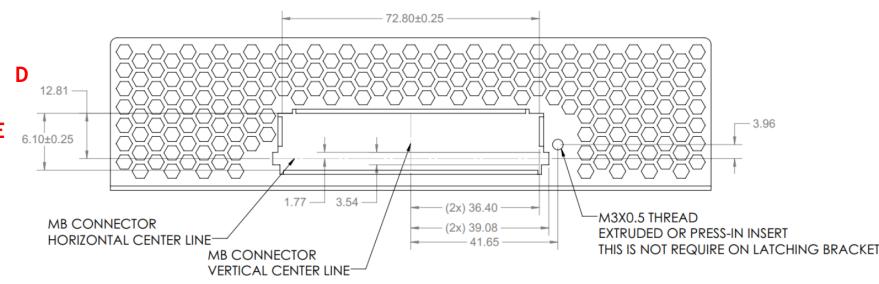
SFF Baseboard Chassis CTF Dimensions (Rear View)
